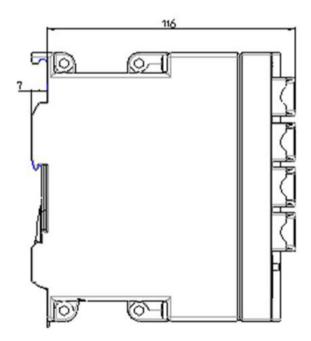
Large design dimension drawing Part 2 (example used here SCALANCE X320-3LD FE)
